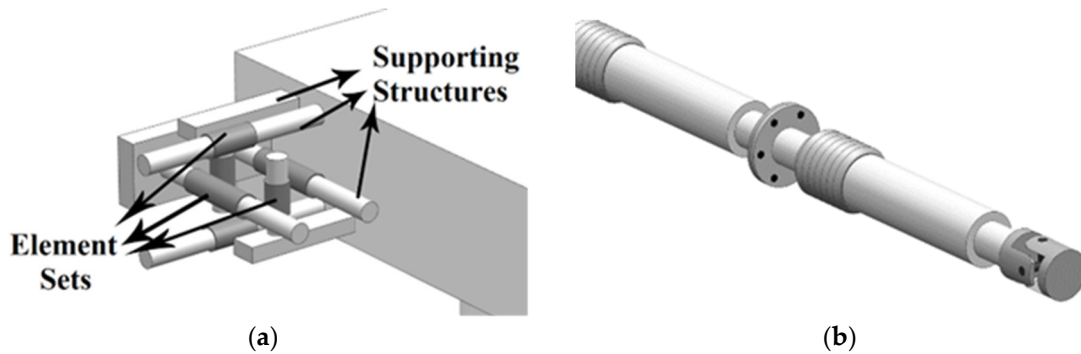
Concept of connection structures: (a) general layout; (b) connection elements.
